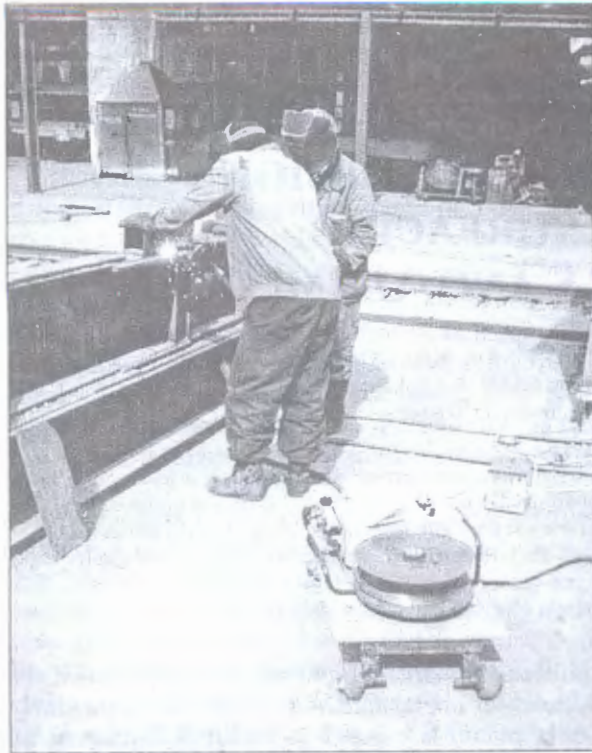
Performance of welding of horizontal welds on a vertical plane of the skin of an electrolyzer case with PSh-107V semi-automatic machine
